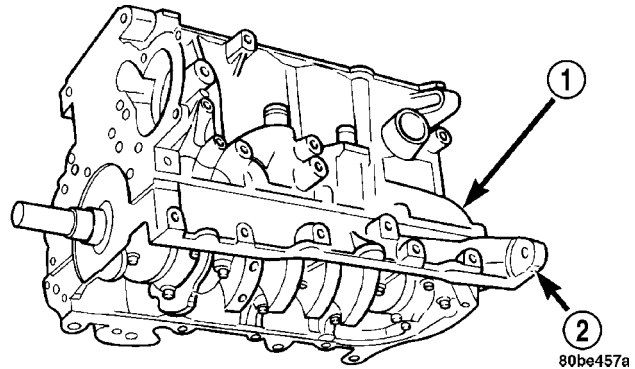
2.4L Cylinder Block and Bedplate - Typical
